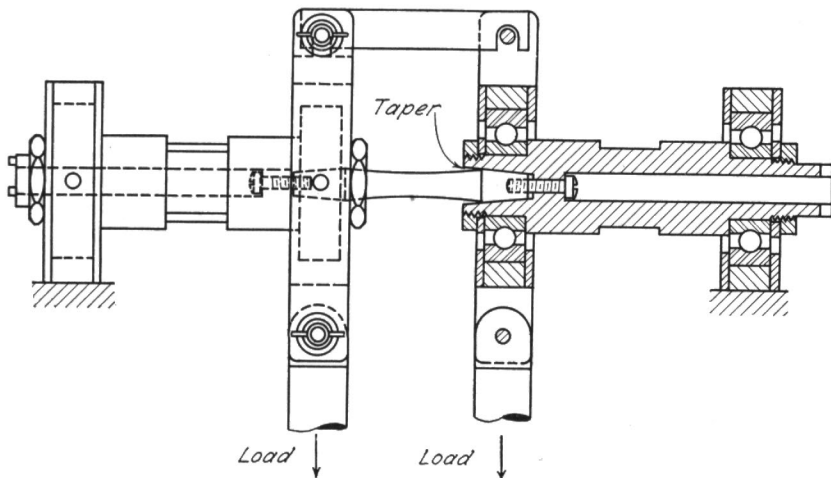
ATTACHMENT TO ROTATING-BEAM TESTING MACHINE
